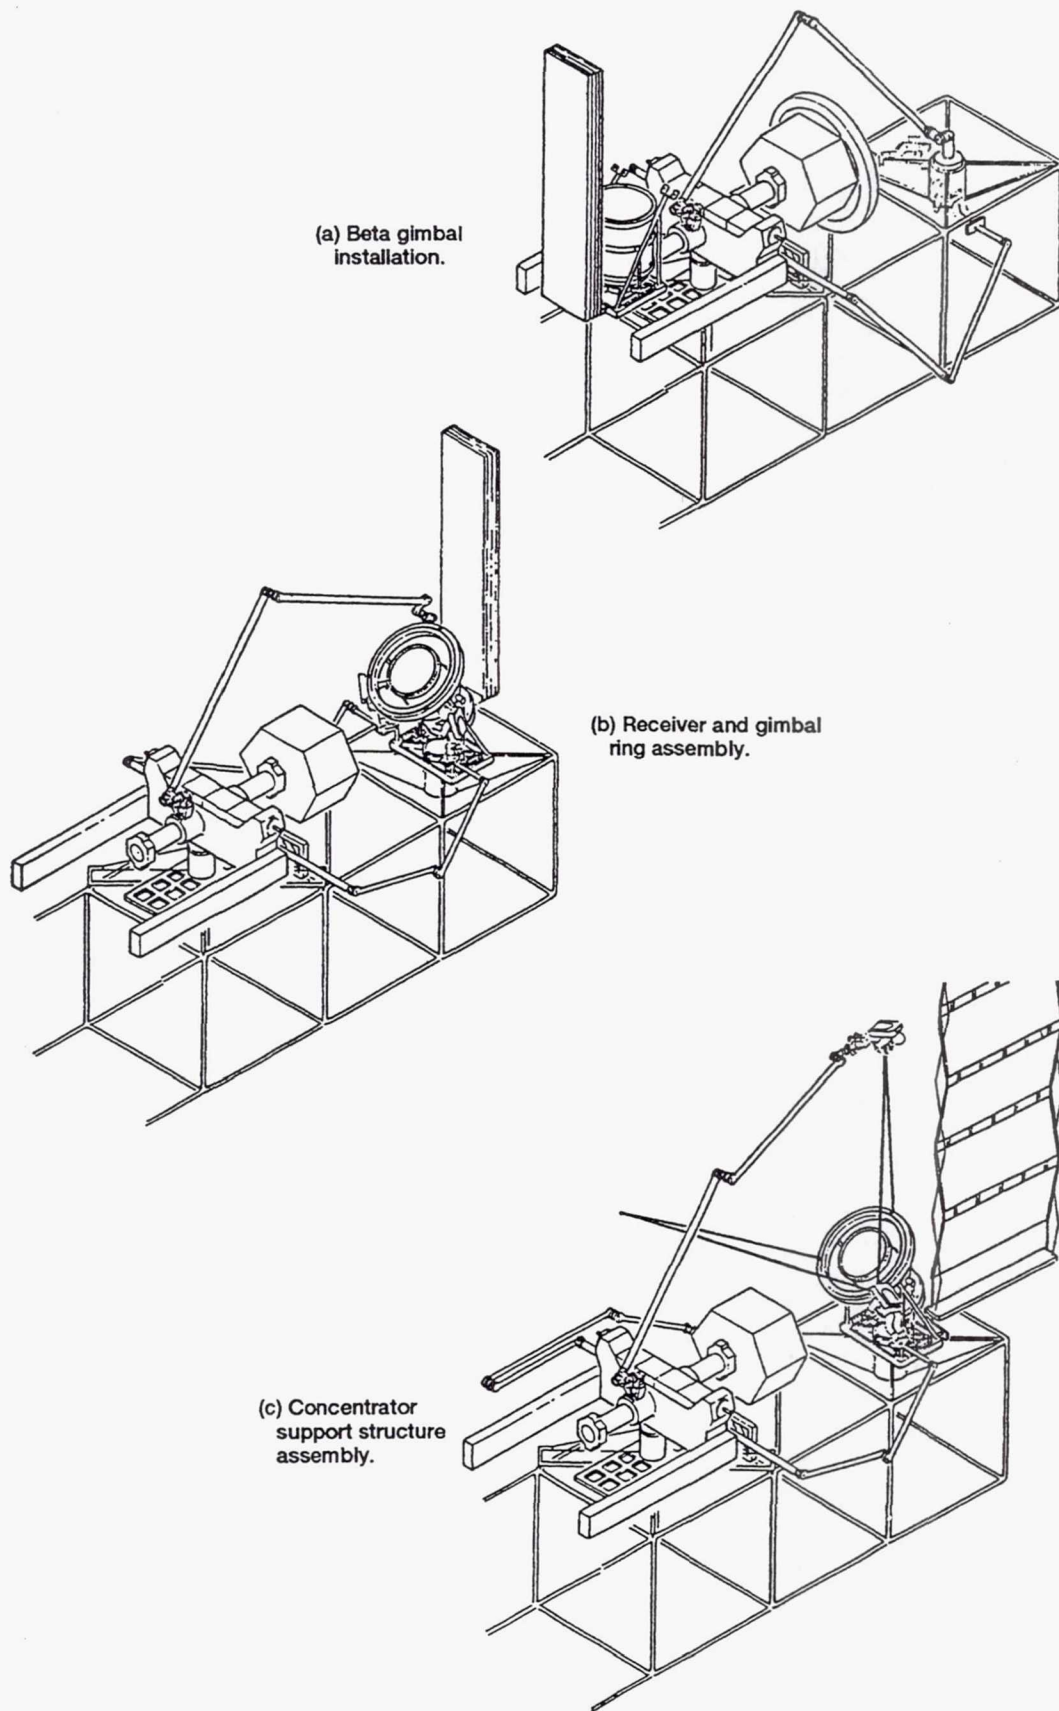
Assembly of beta gimbal, receiver, gimbal ring, and concentrator support structure.
